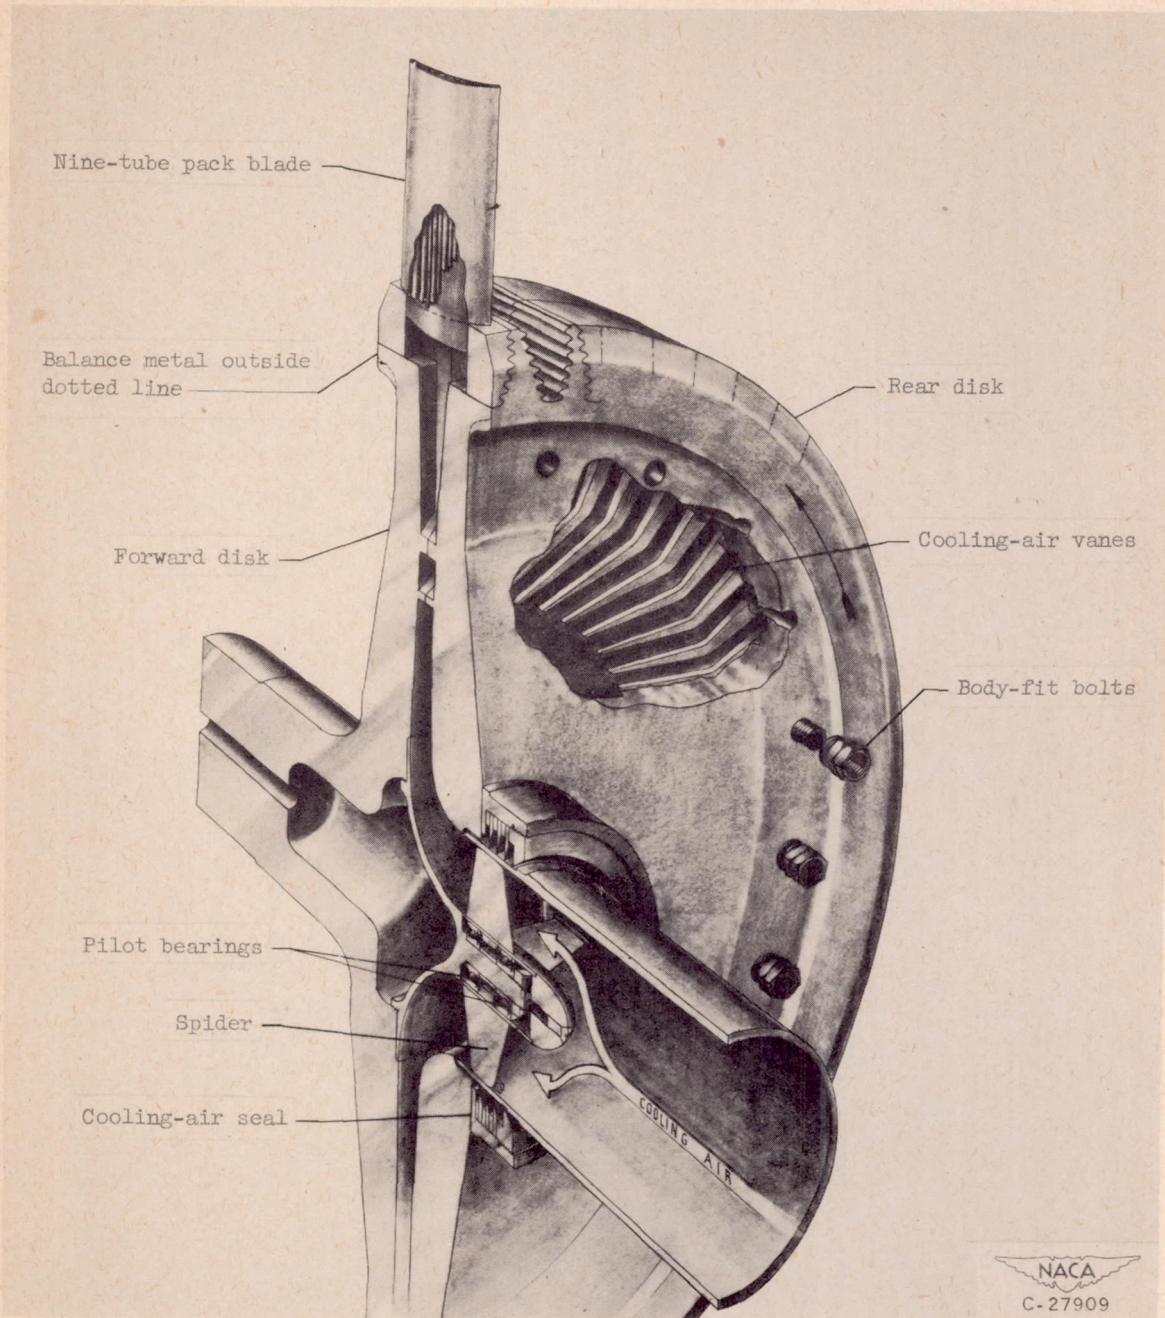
Air-cooled split rotor with 54 integrally machined vanes.
